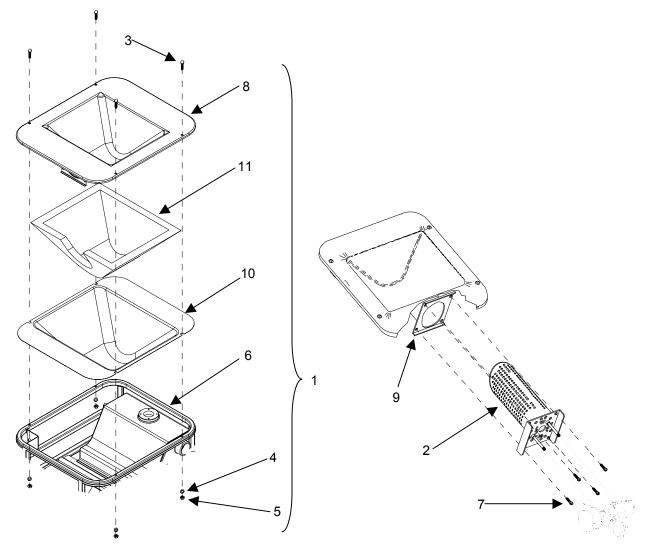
Replace the Reflective Heat Shield and Burner Assembly
